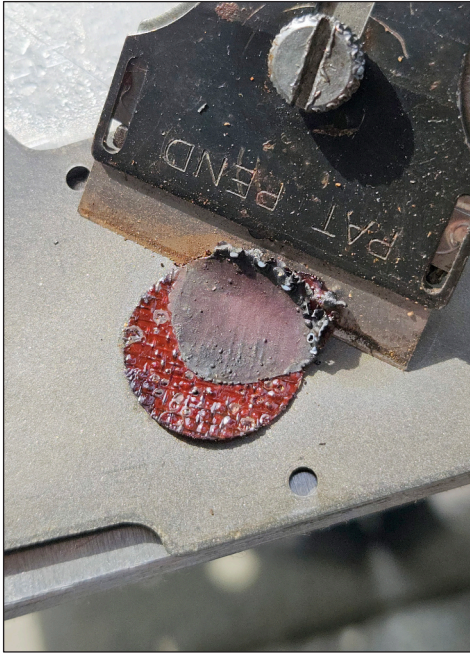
Removal of old adhesive from backing plate with razor blade scraper
